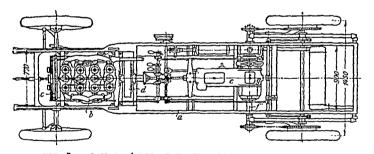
PLAN OF 4-OYLINDER PETROL MOTOR, CHAIN-DRIVEN
